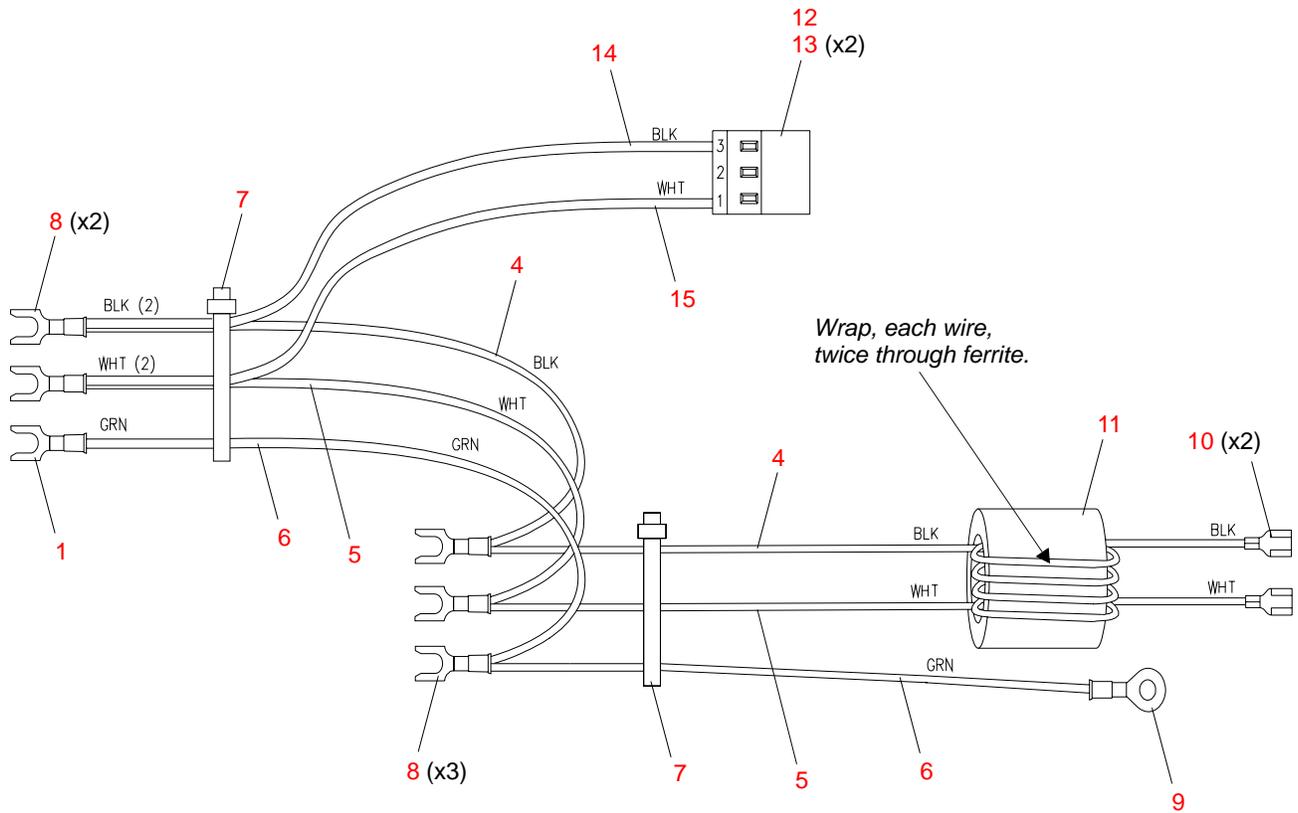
VLX Wash A/C Supply Cable Assembly
